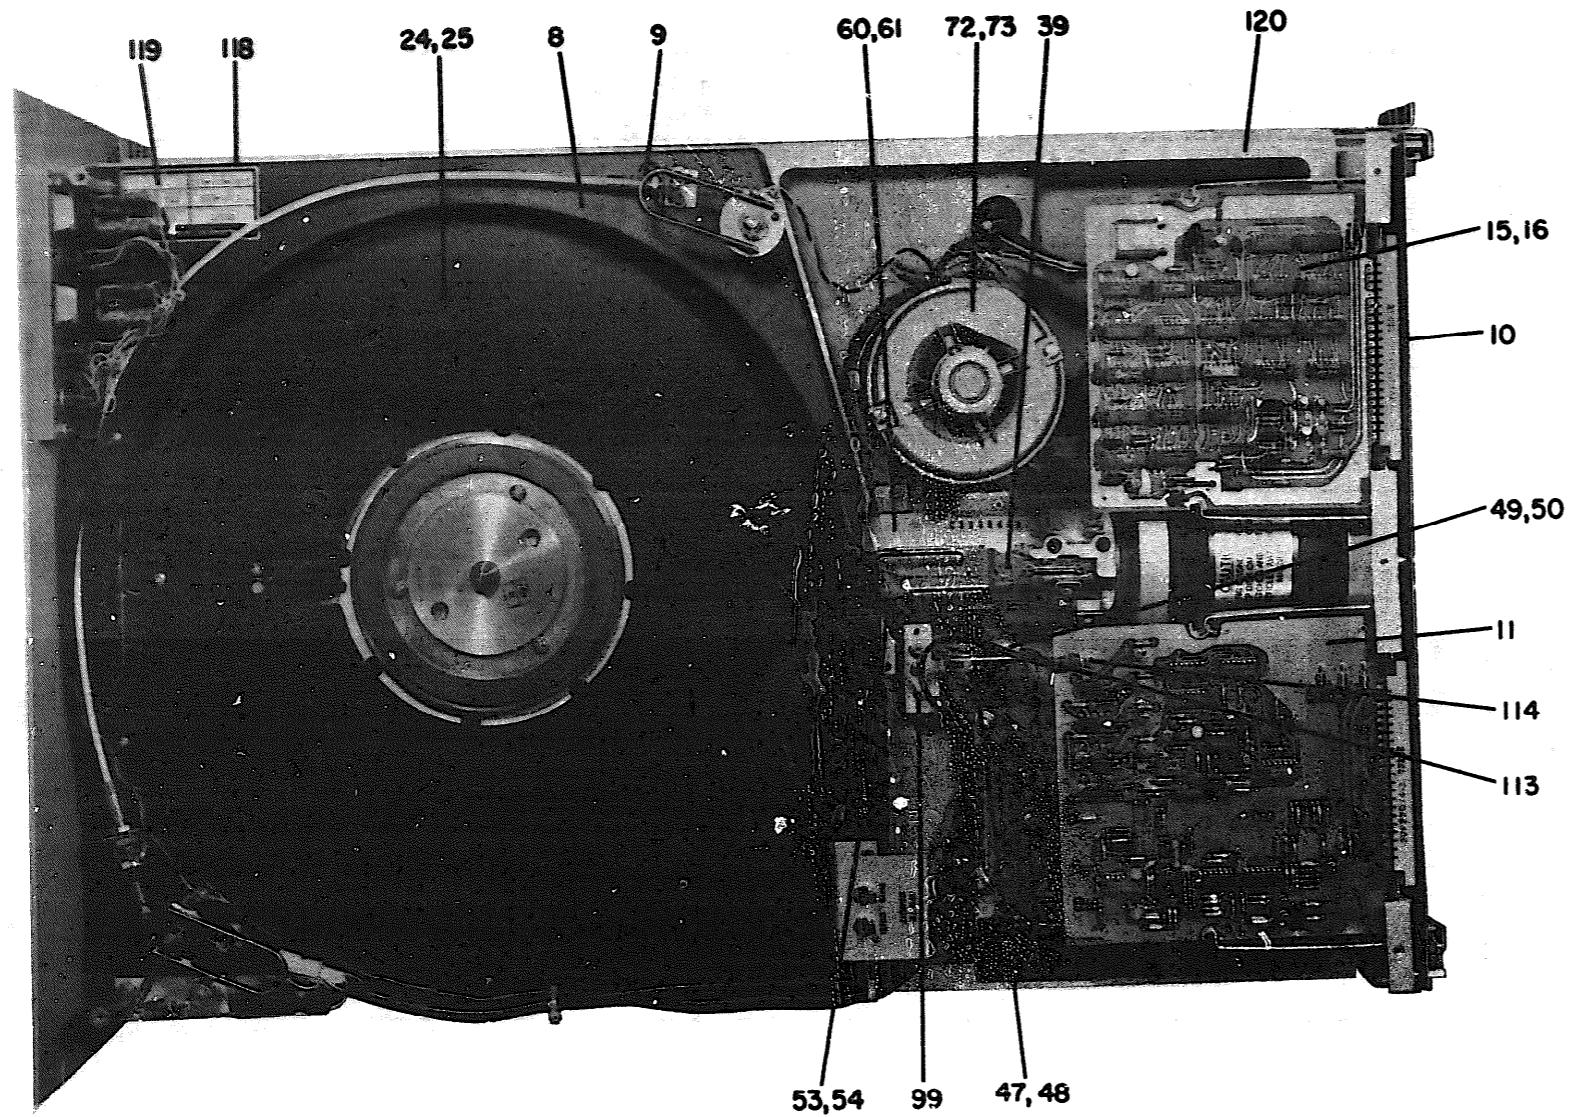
Disc Drive Assembly (Sheet 2 of 5).
